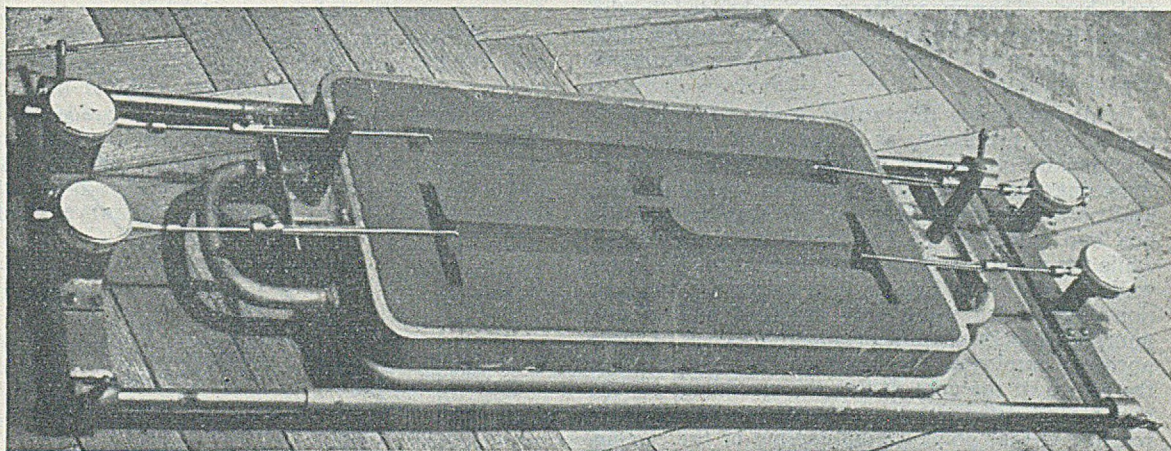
Moulding-box Assembly for Flanged-bar Casting with Cope Half Removed to show Method of Measuring Contraction.
